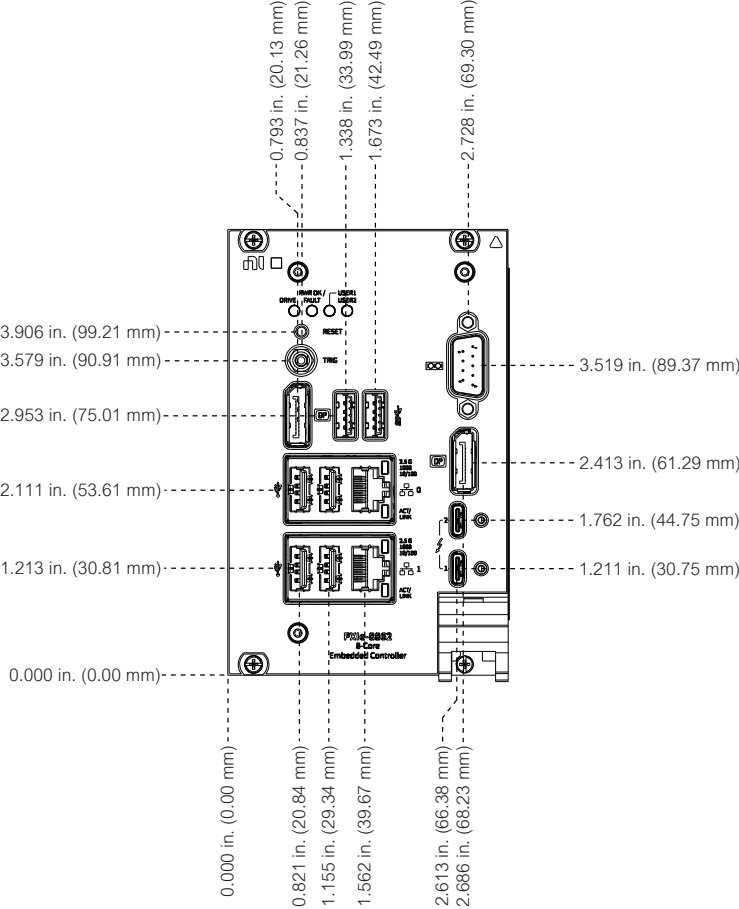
PXle-8862 with Removable Drive Front Panel Layout and Dimensions
